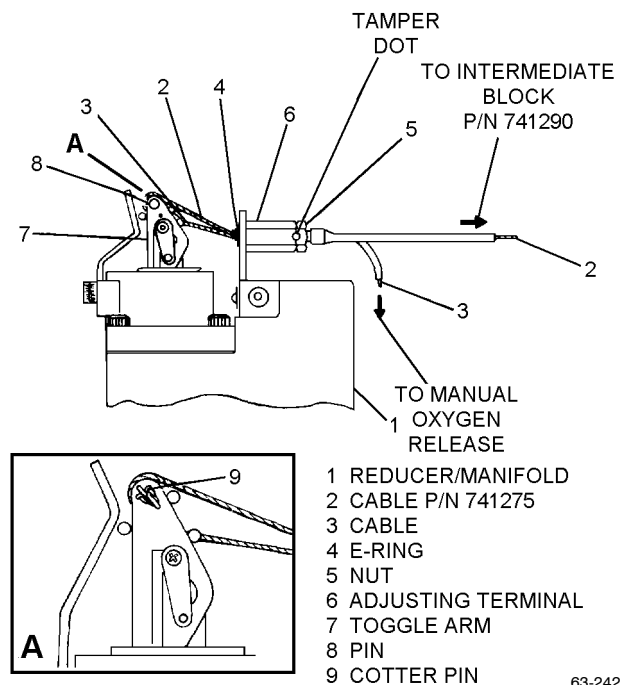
Reducer/Manifold Assembly P/N 741370 Cable Routing
